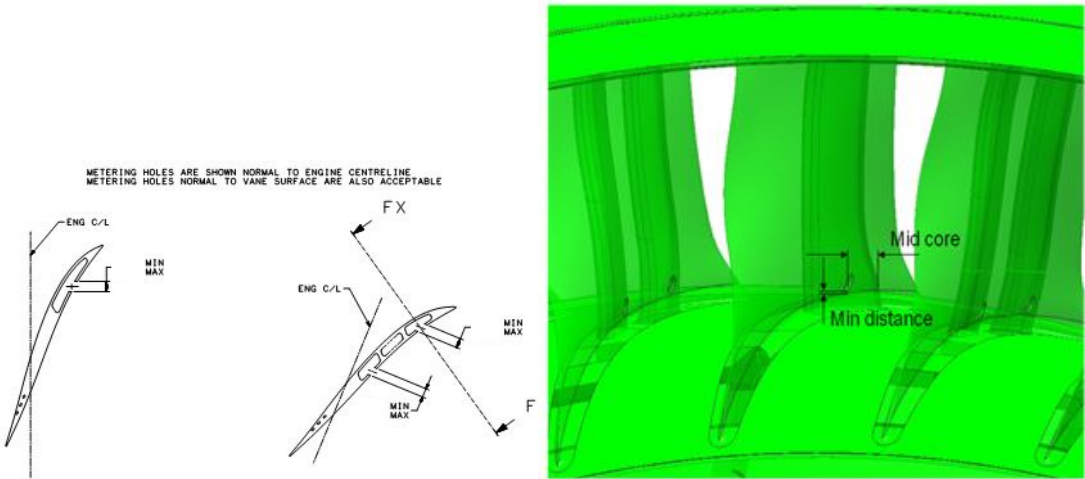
Airfoil De-icing Holes Model and Drawings (C/O JOHNSON, 2011a)
